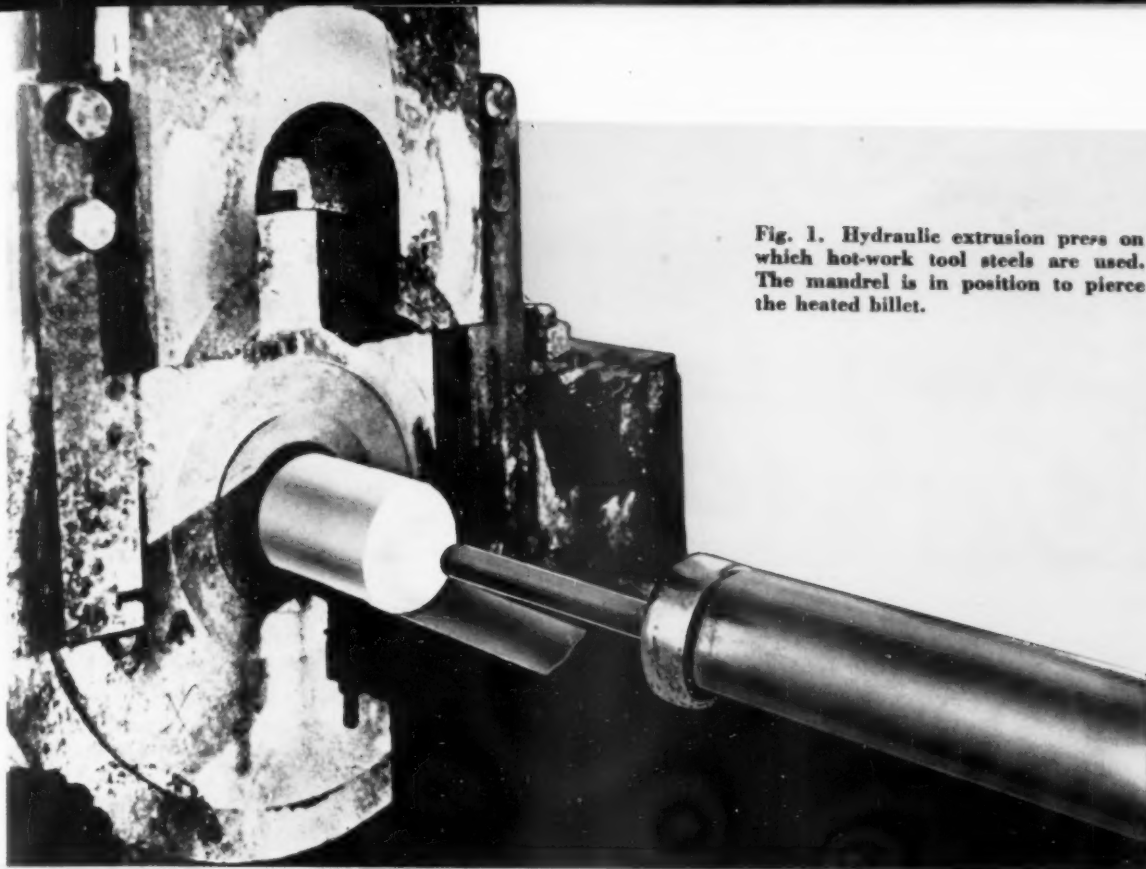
Hydraulic extrusion press on which hot-work tool steels are used. The mandrel is in position to pierce the heated billet.
